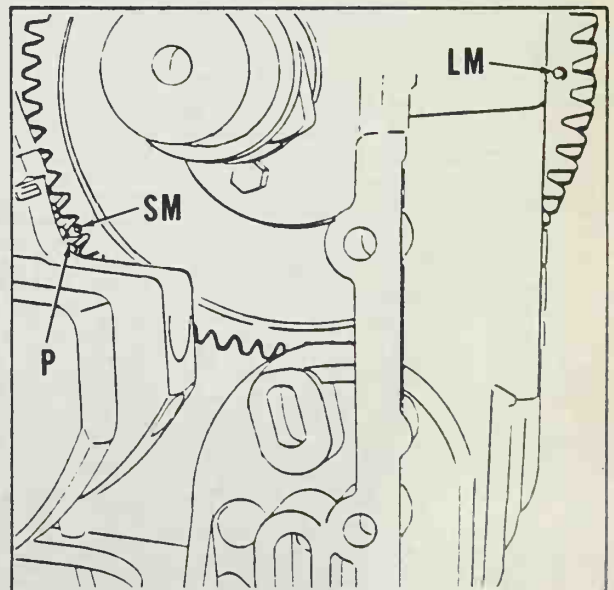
View of large (LM) and small (SM) camshaft timing marks and red paint mark (P) on crankshaft gear of Models WD1-660, WD1-670 and WD1-750.
